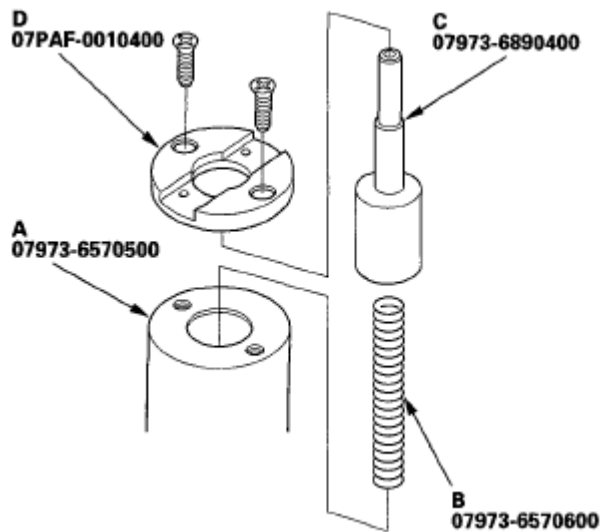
Locating Piston Base, Piston Base Spring, Piston Pin Base Insert & Piston Base Head
